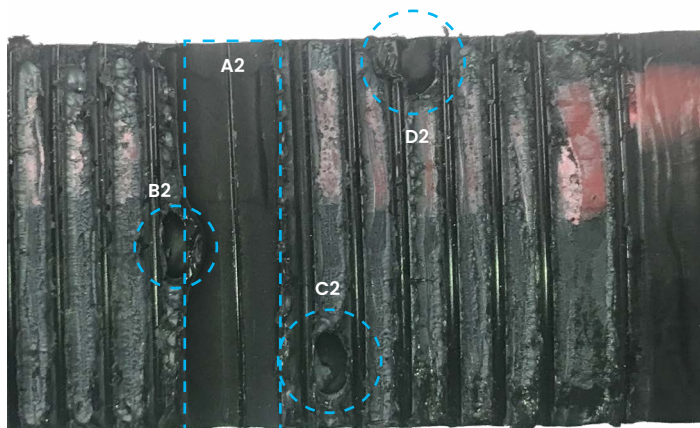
shows the pipe side of an EF weld exhibiting a large void (A2) that transverses the entire width of the test sample plus three small voids (B2, C2 & D2). Remaining area exhibits ductile yielding in the plane of wires.
